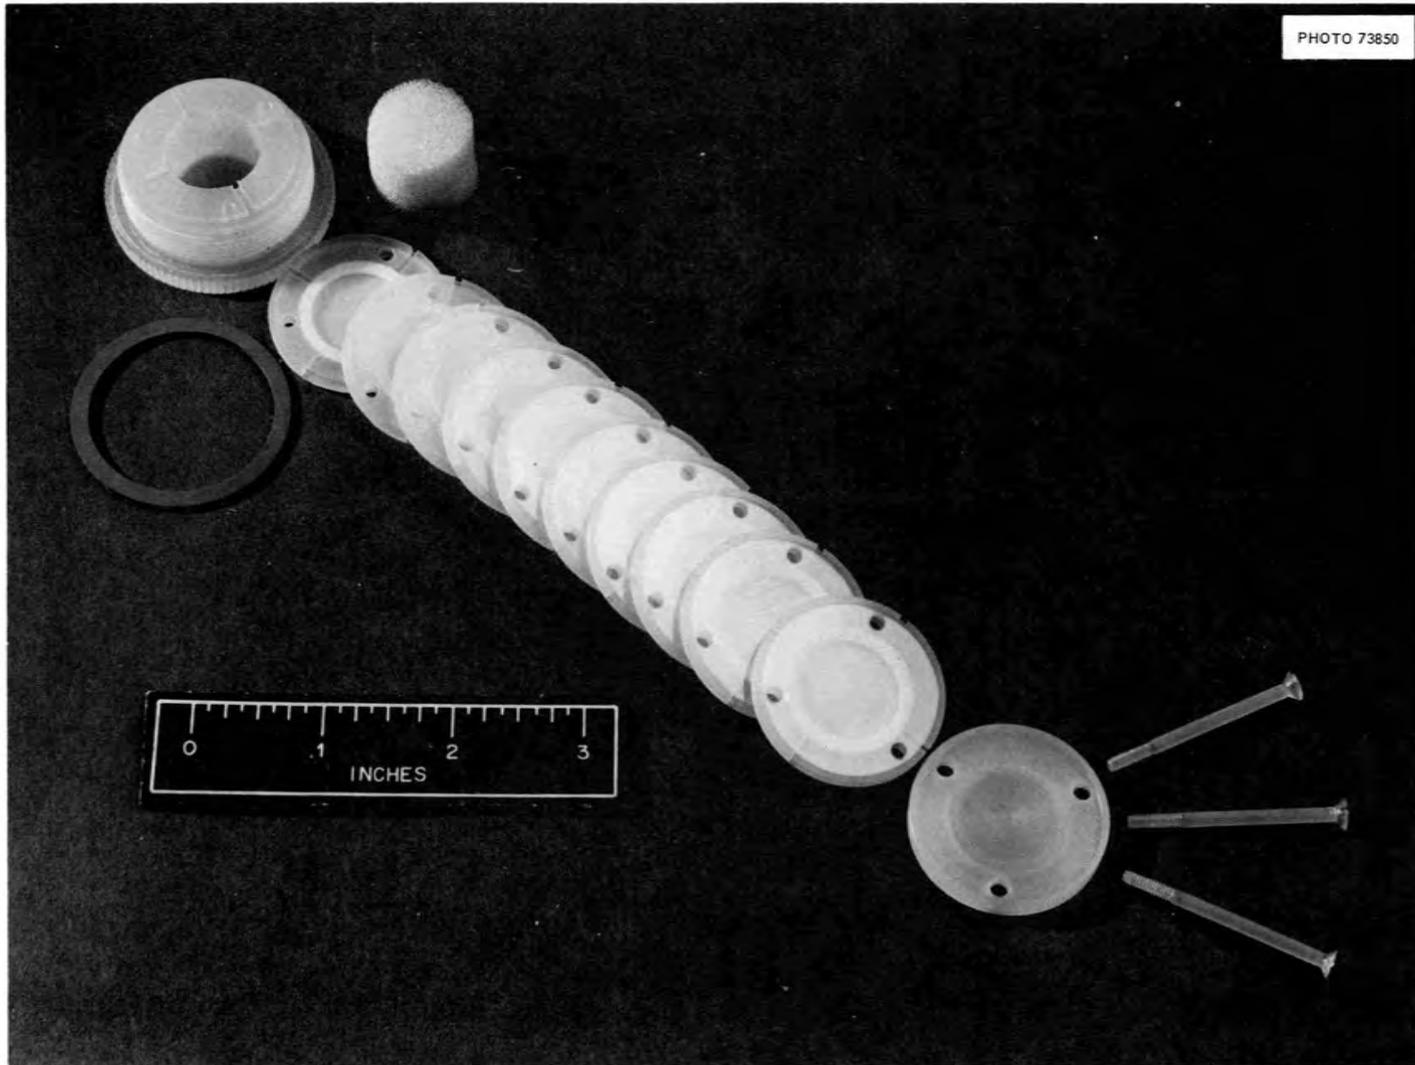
Photograph of Disassembled Module Showing Gasket, Assembly Cap, Sponge, Ten Filter Disks, End Cap, and Screws.
